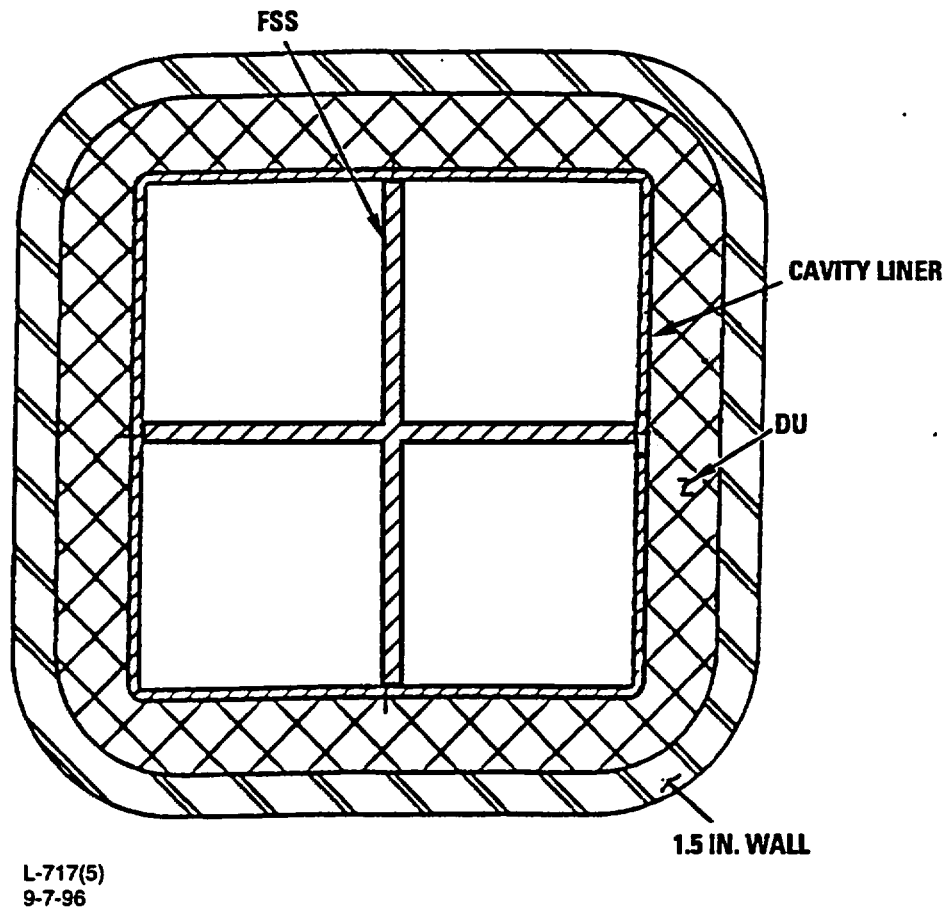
GA-4 cask cross section showing cavity liner/FSS assembly
